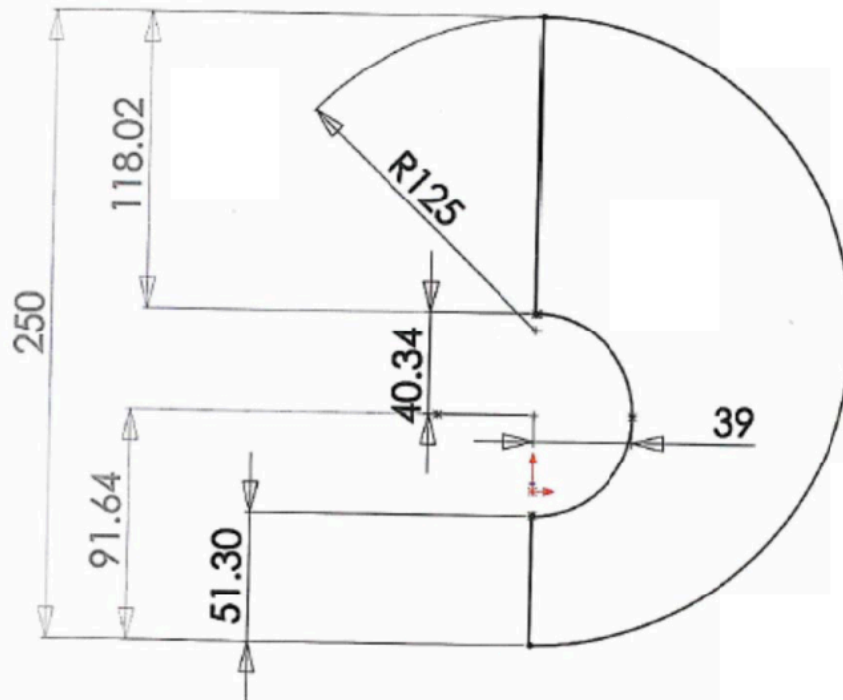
Dimensions for an elliptical cut to match a 15° angle on the pipe, with a one millimetre clearance around the pipe.
